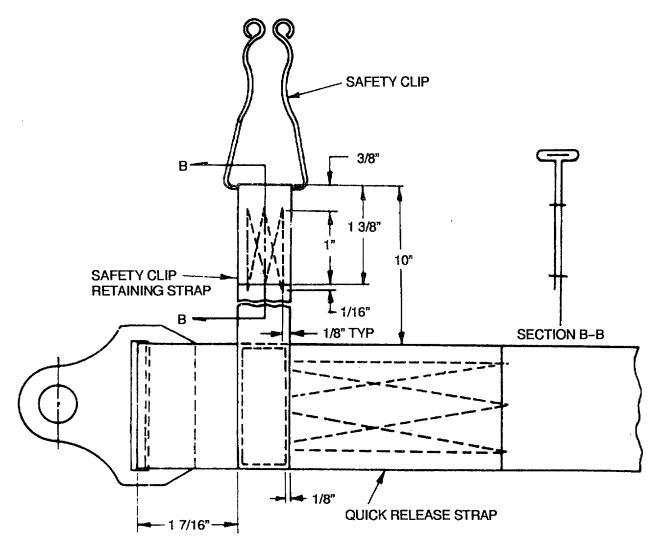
Fabrication and Installation Details of the Safety Clip Retaining Straps
